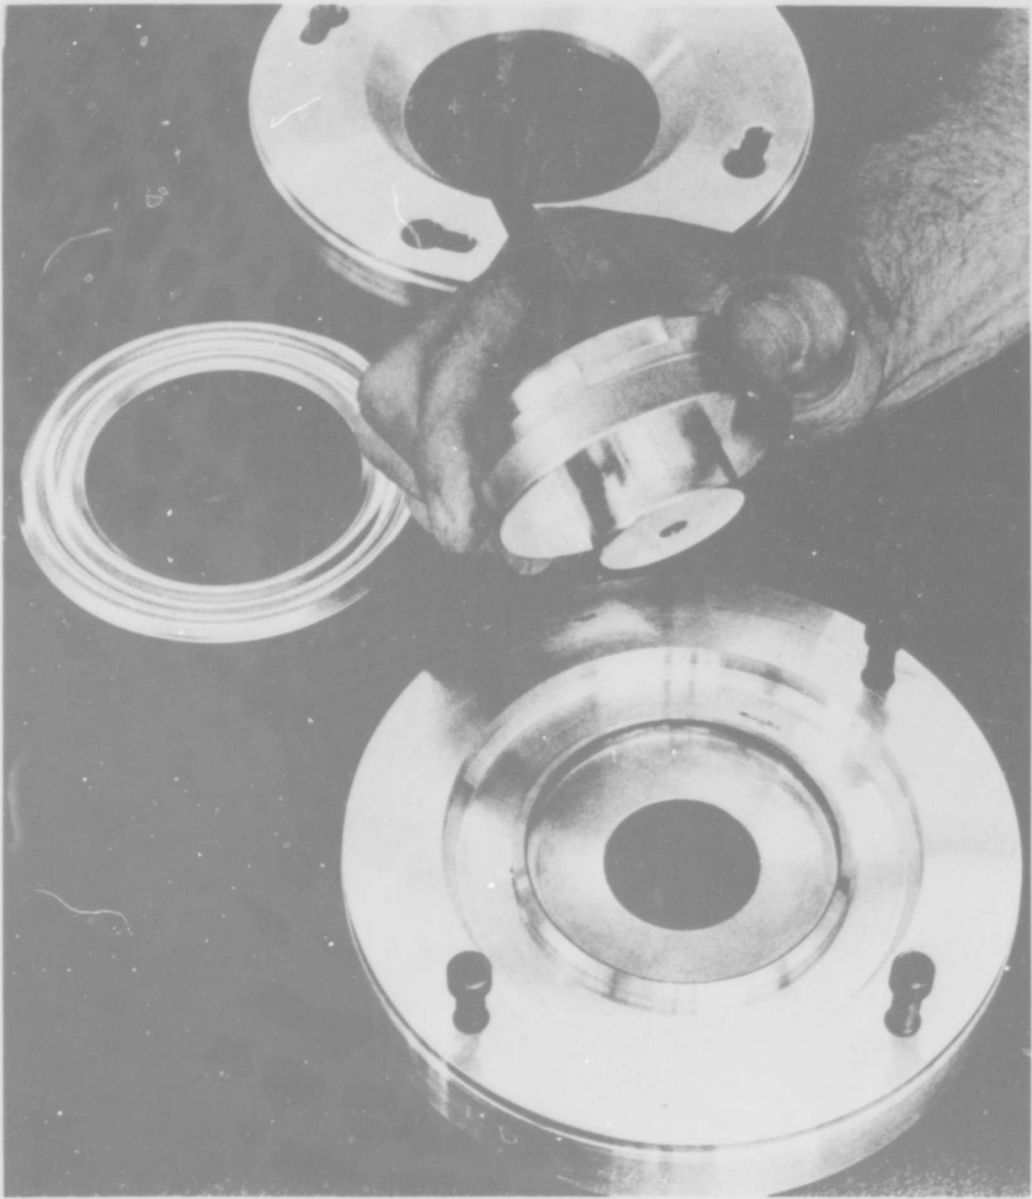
PARTIAL DISASSEMBLY OF THE INNER-CONVOLUTION-WELD TOOLING
